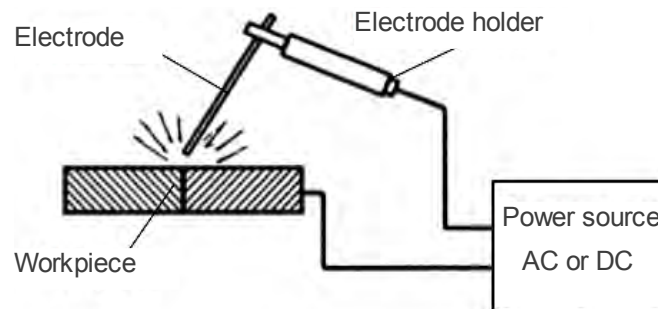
Schematic diagram of MMA welding [15]
